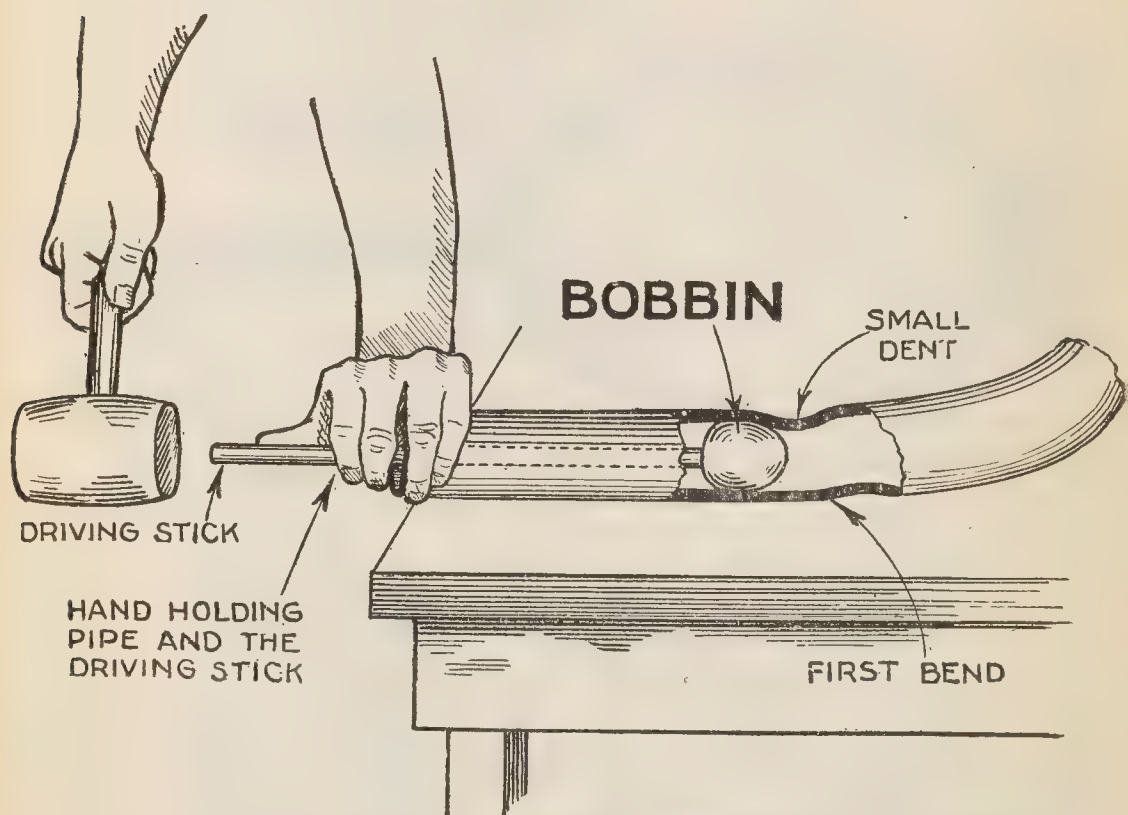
,512.—*Bending with bobbins, 1.* First bend showing removal of throat distortion by driving through a bobbin.
